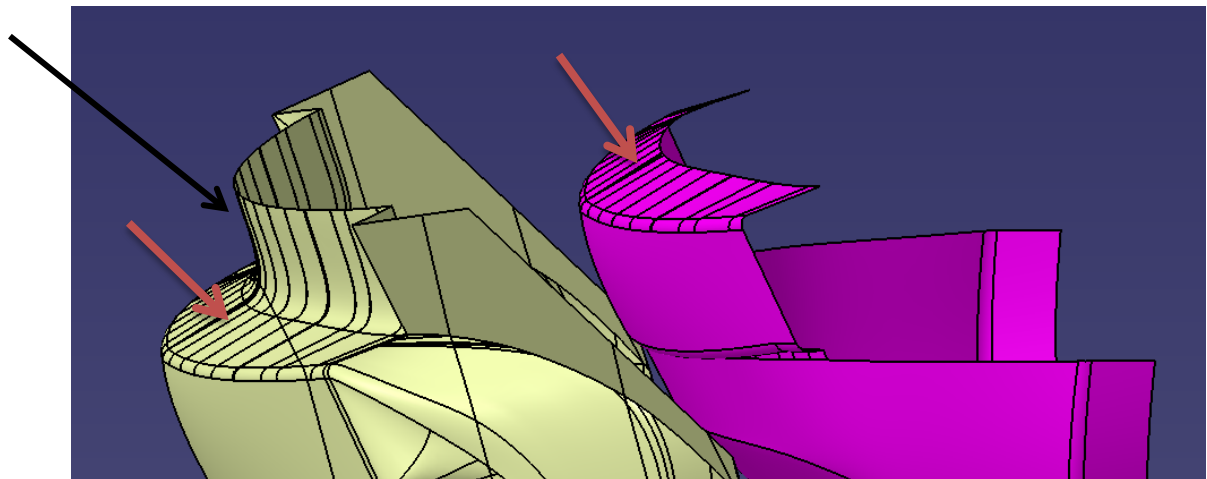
Mold surface (light yellow), part surface (pink), corresponding surfaces (red arrows) and flange surface (black arrow)
